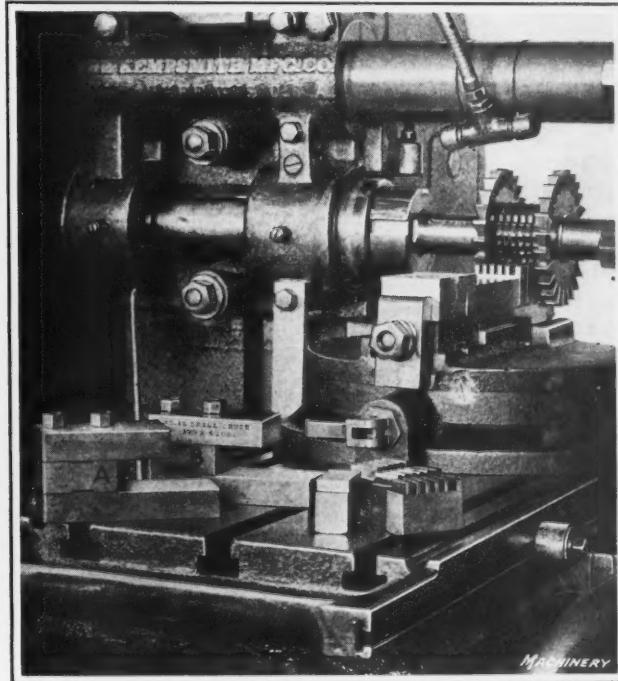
Straddle-milling the Jaws and cutting the Teeth
